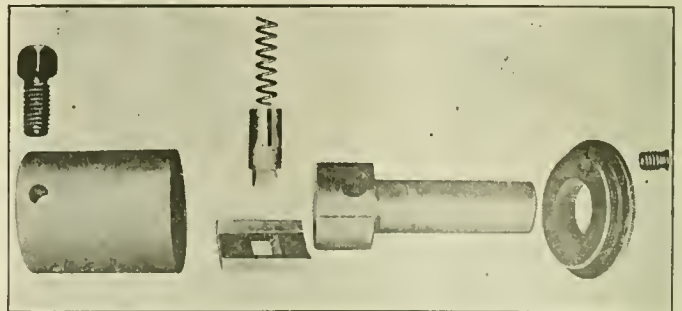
View Showing Parts of Clutch Tap and Die Holder
